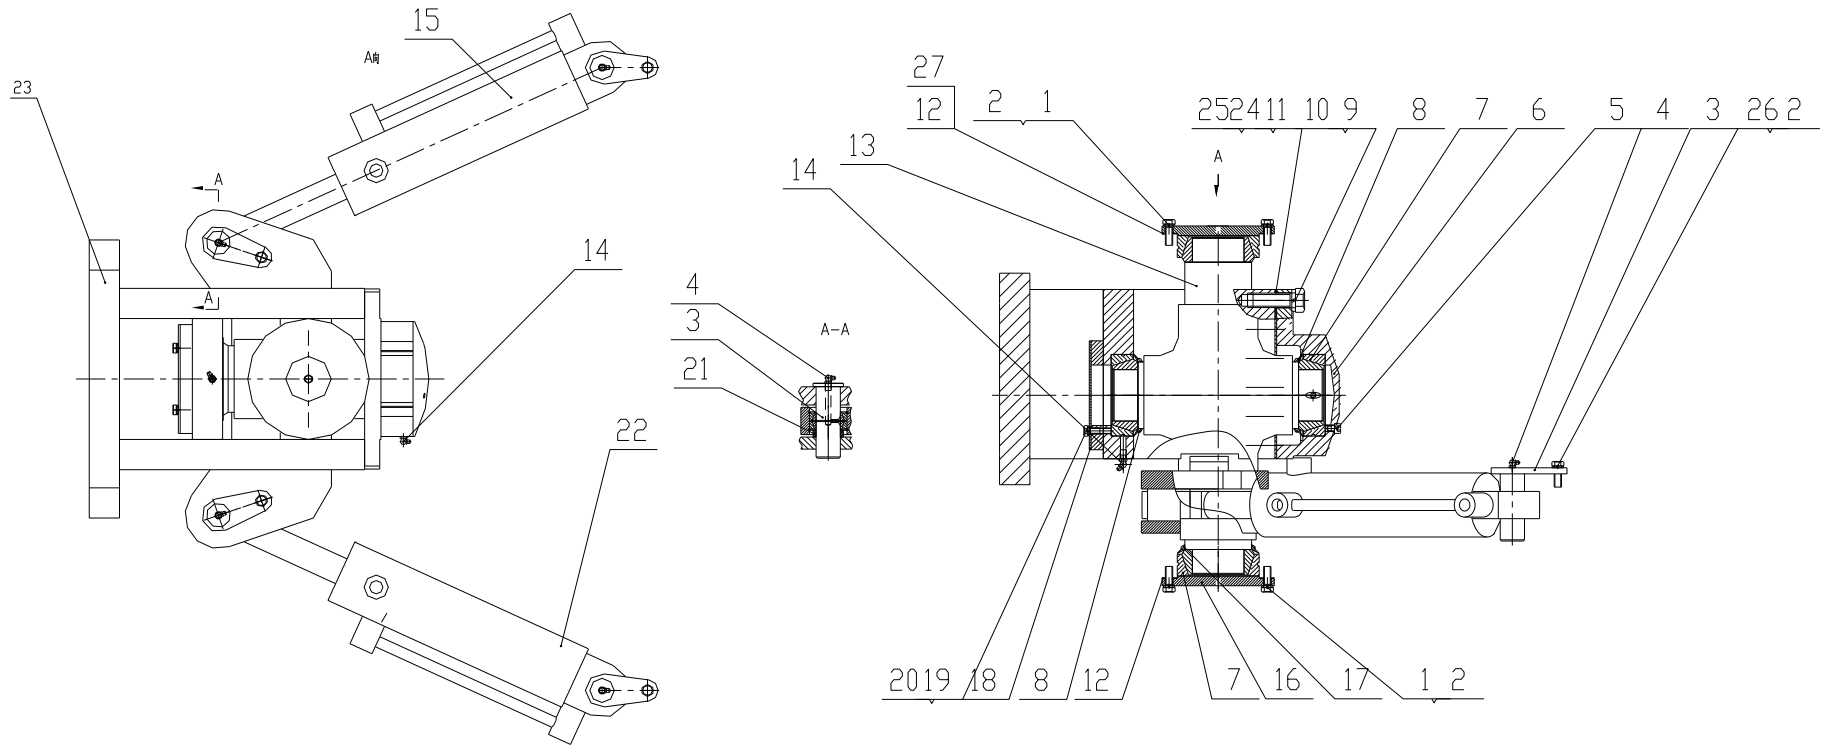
Articulated bracket assembly 铰接架总成			Remarks
